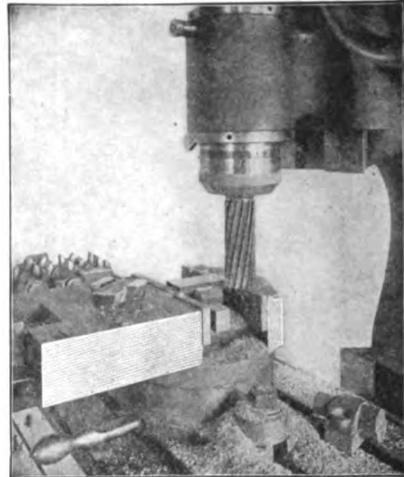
Small Parts Rapidly Finished in Vertical Milling Machine.
